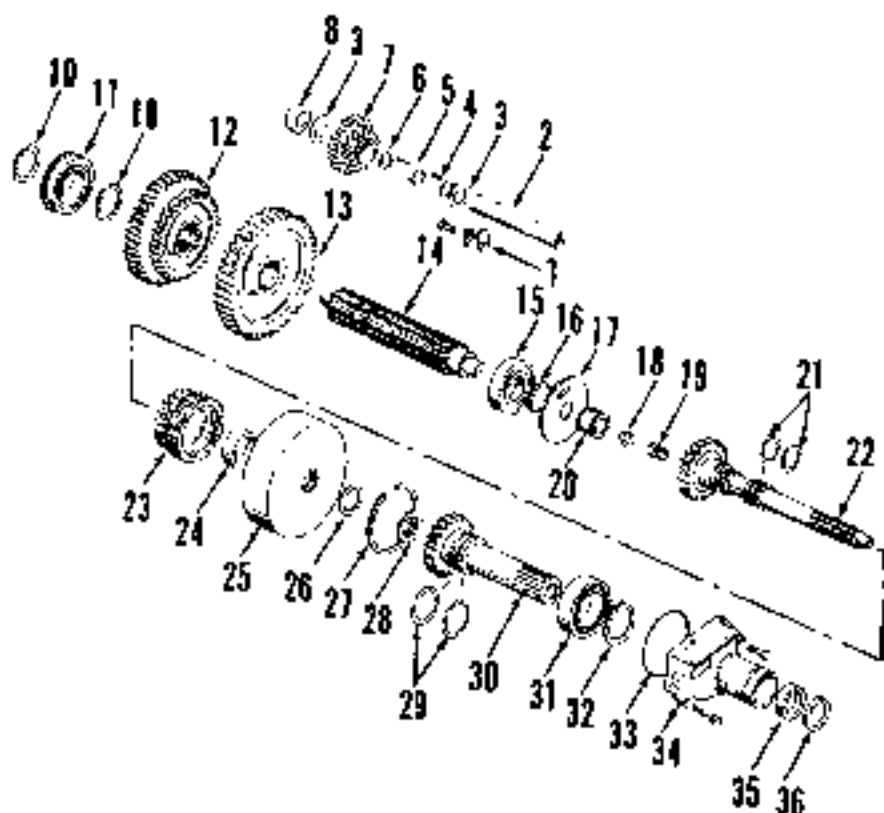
Exploded view of transmission upper shafts and associated parts, reverse idler gear assembly and Multi-Power clutch unit.
